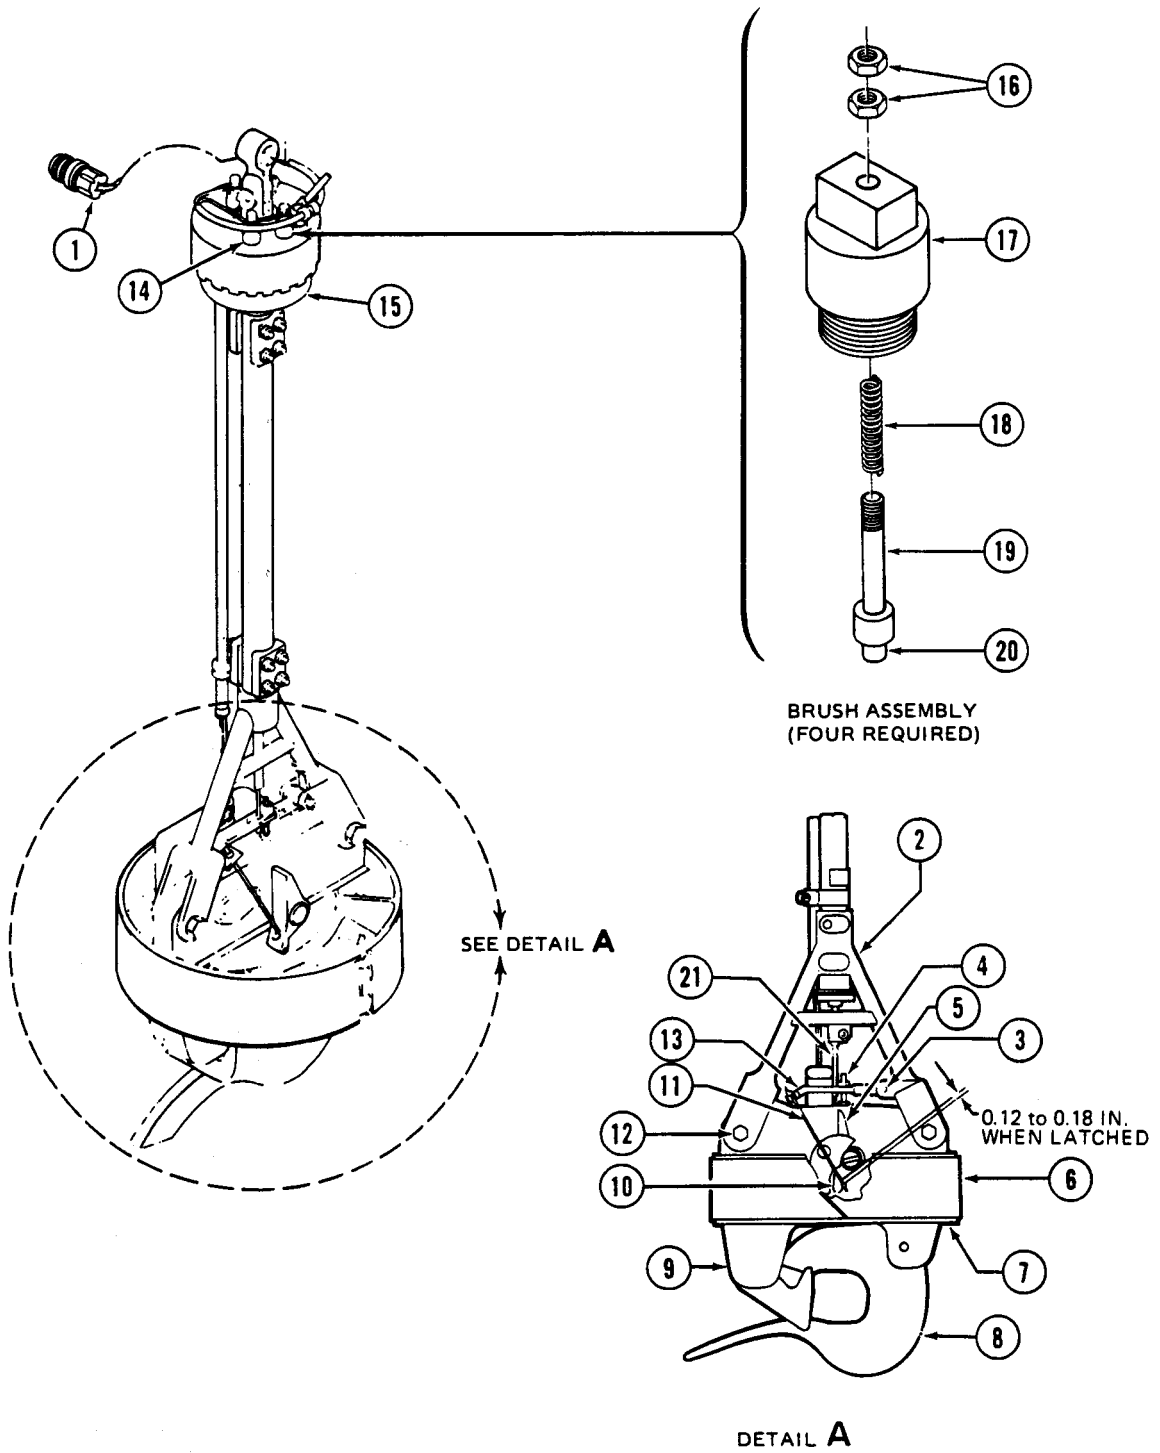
Cargo suspension assembly (Sheet 1 of 2)
